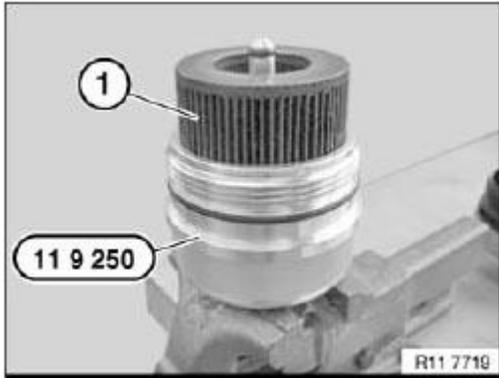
Identifying Filter Element With Special Tool (11 9 250)
